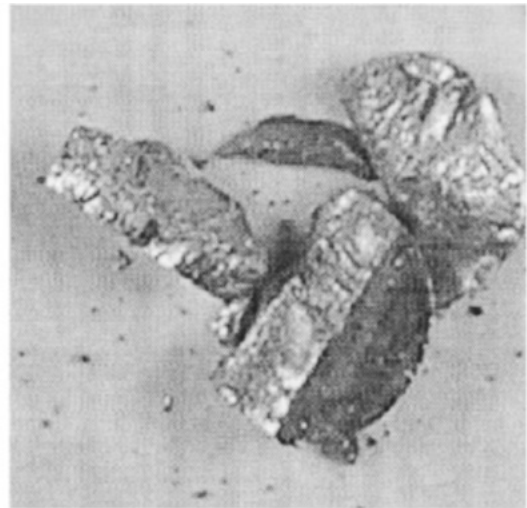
View of Ni₂₀Si₁₀Ti alloy shear fractured.
